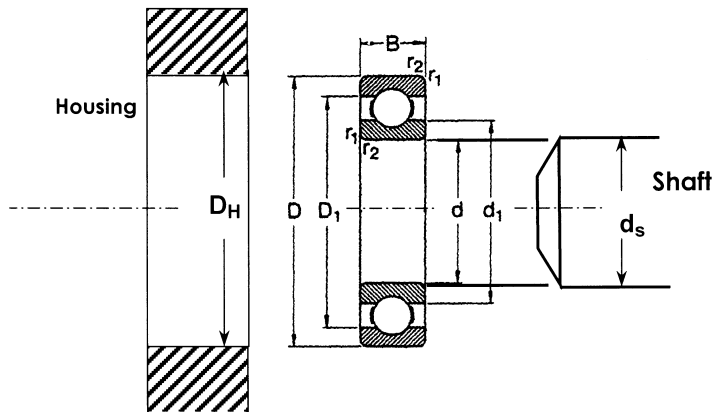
Dimensions and tolerances of rolling bearing, shaft, and housing.
